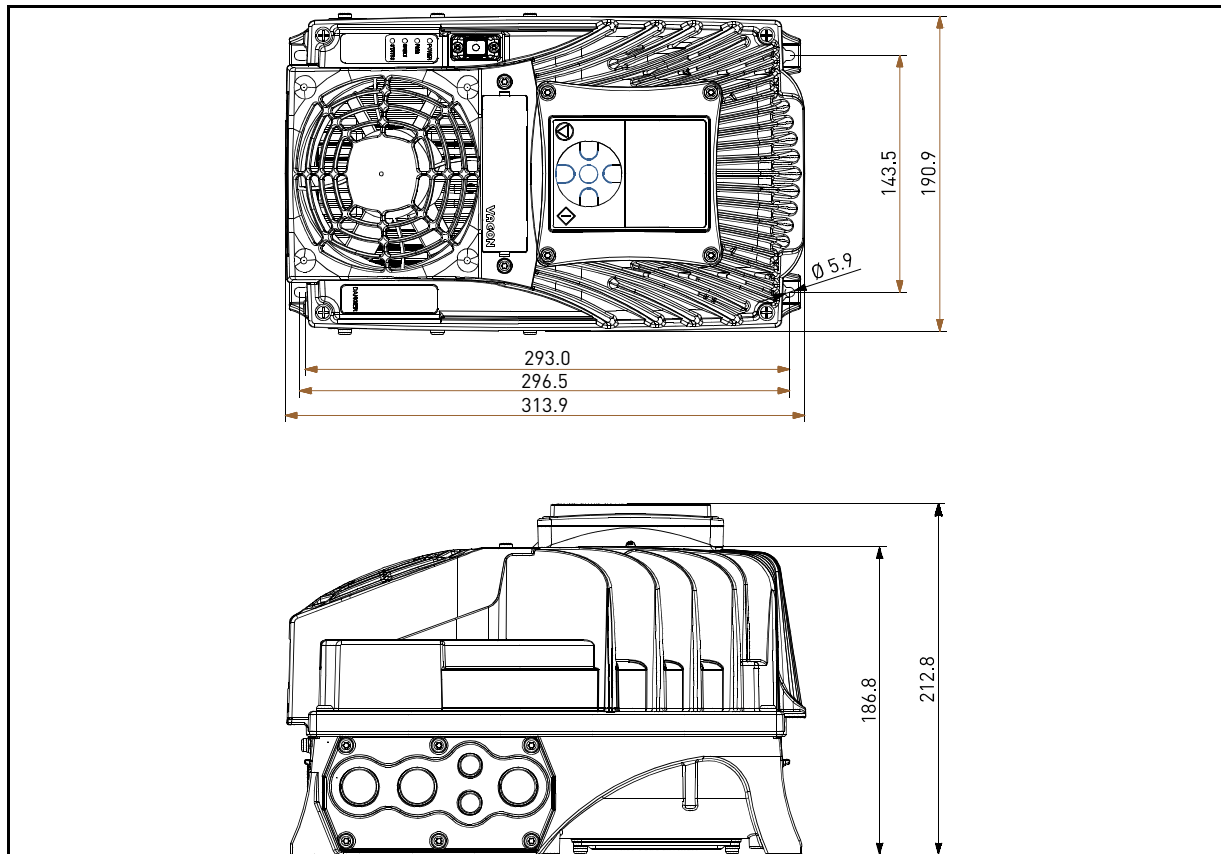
Vacon 100 Motor Mountable drive dimensions, MM4
